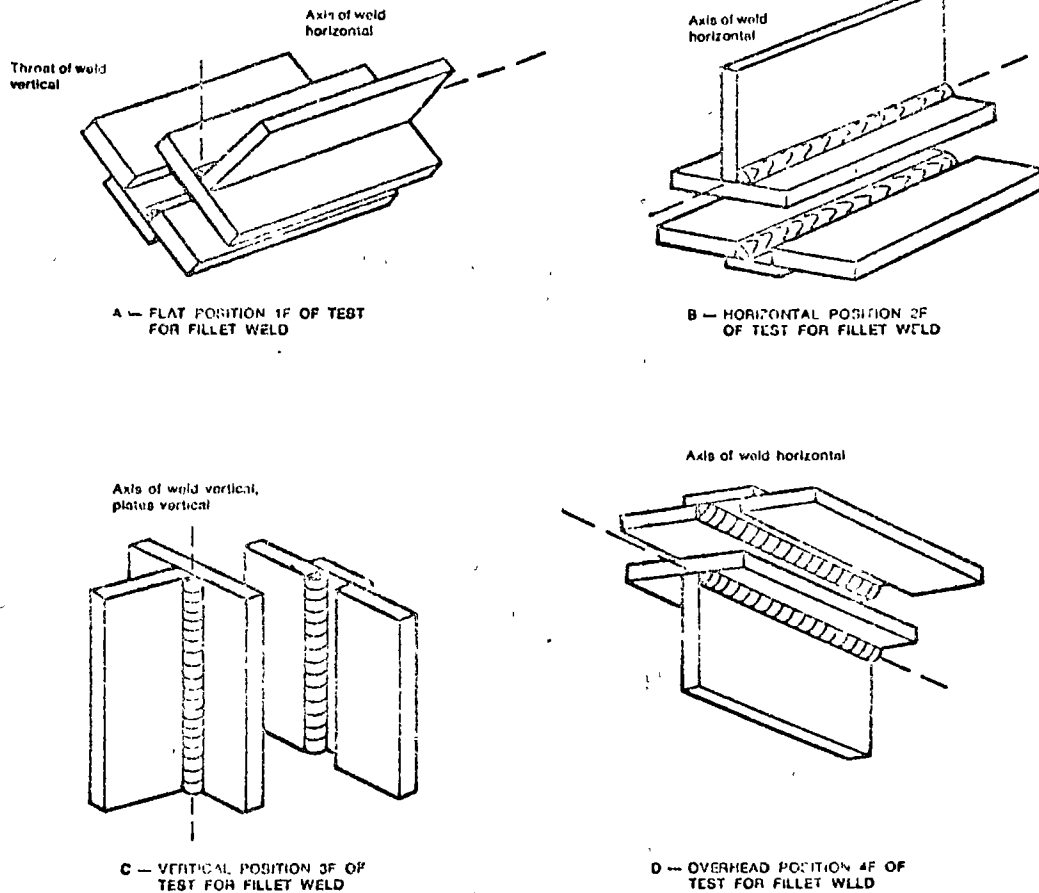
Positions of test plates for fillet welds.
